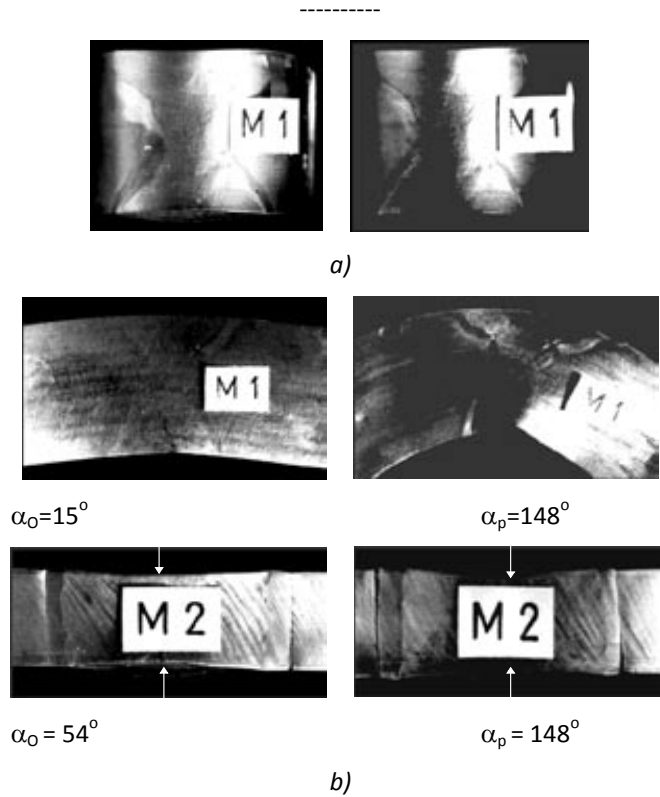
The appearance of homogeneous under-matched weld joint during side a) and cap b) specimen bending
